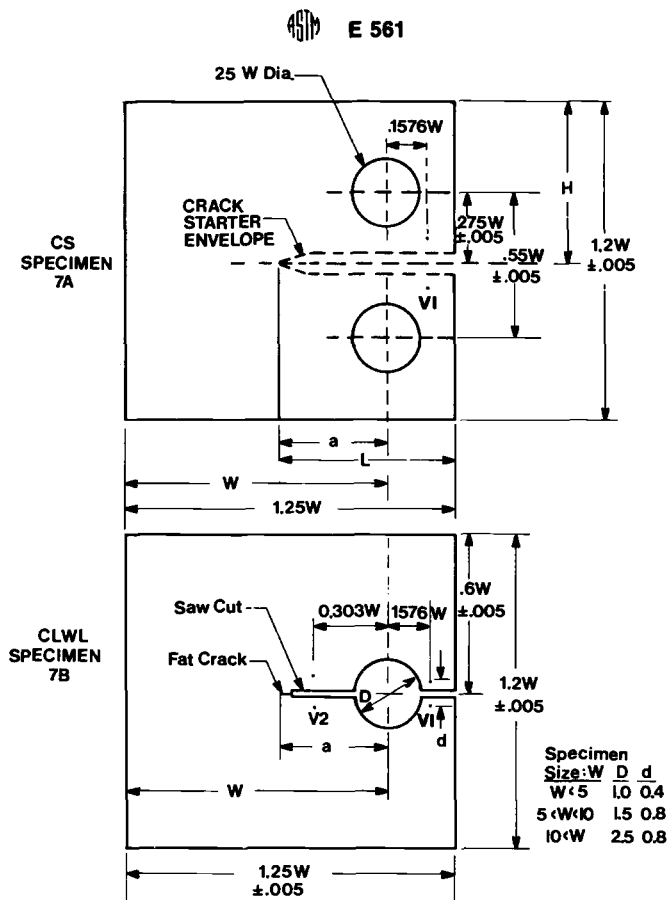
Compact and Crack-Line-Wedge-Loaded Specimens.
